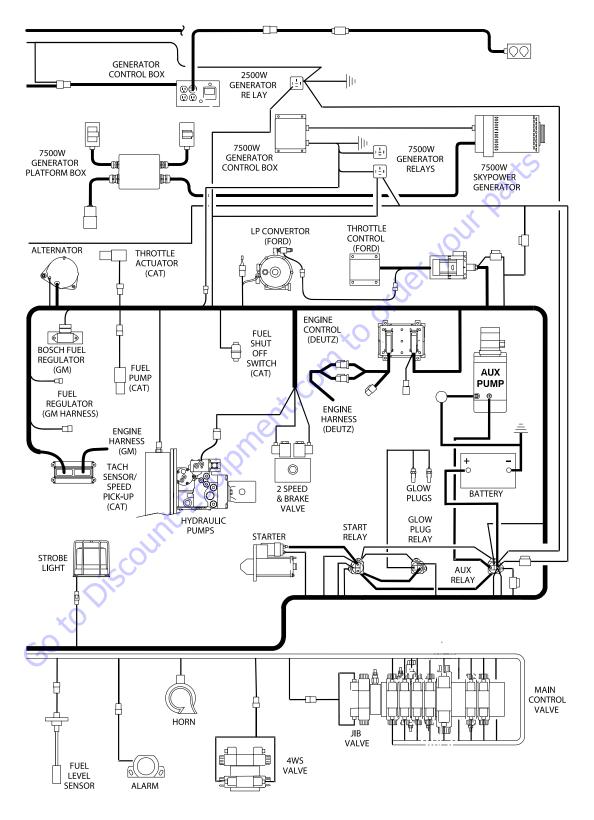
Electrical Components Installation (Without UGM) - Sheet 2 of 2
